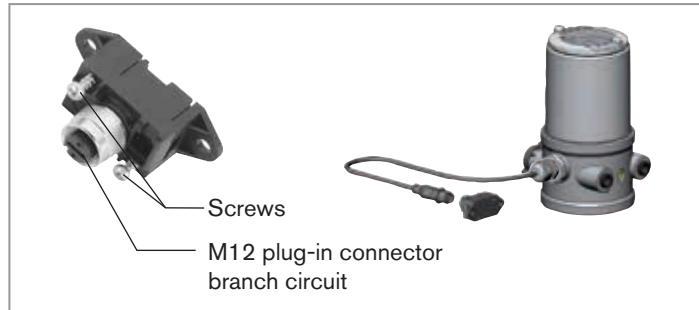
Control head 8695 with multi-pole cable and ribbon cable terminal
